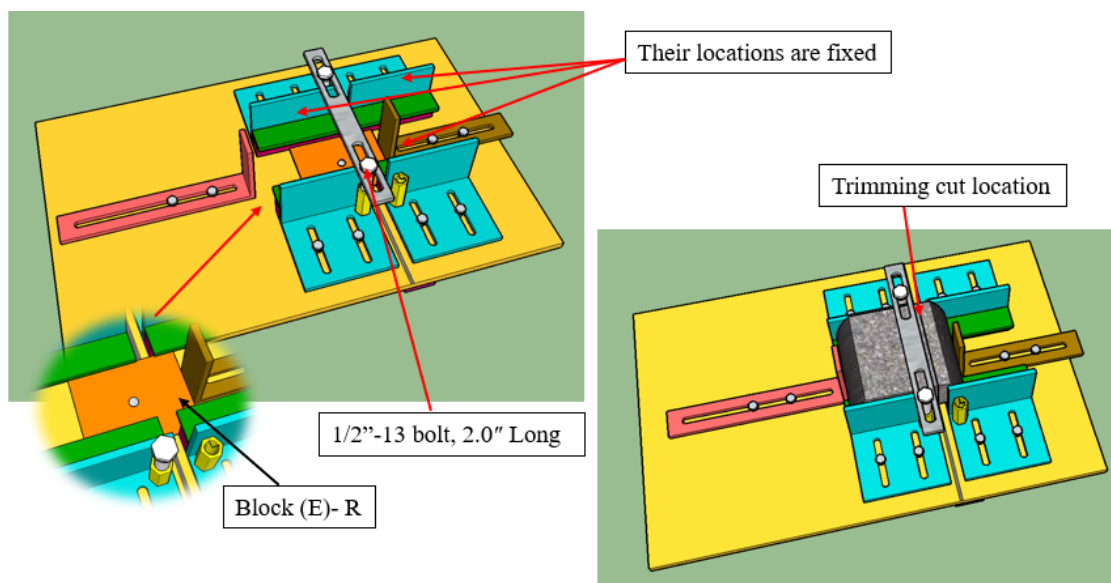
Illustration drawings to the fourth trim of RV specimens.
